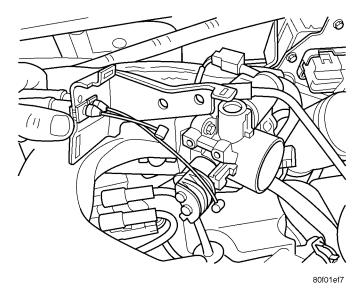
Throttle Cable Bracket - 2.4L Turbo
